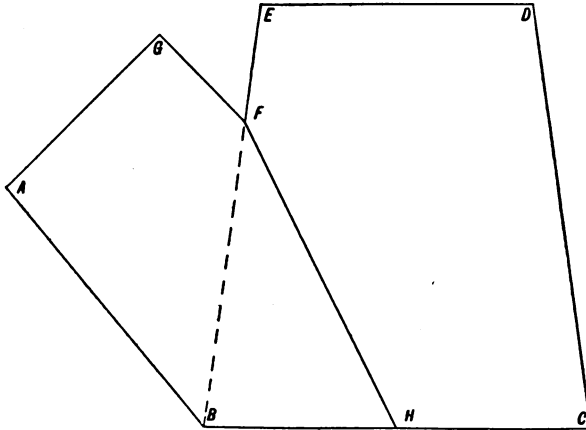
The Elevation or Section of a Two Pronged Fitting.
